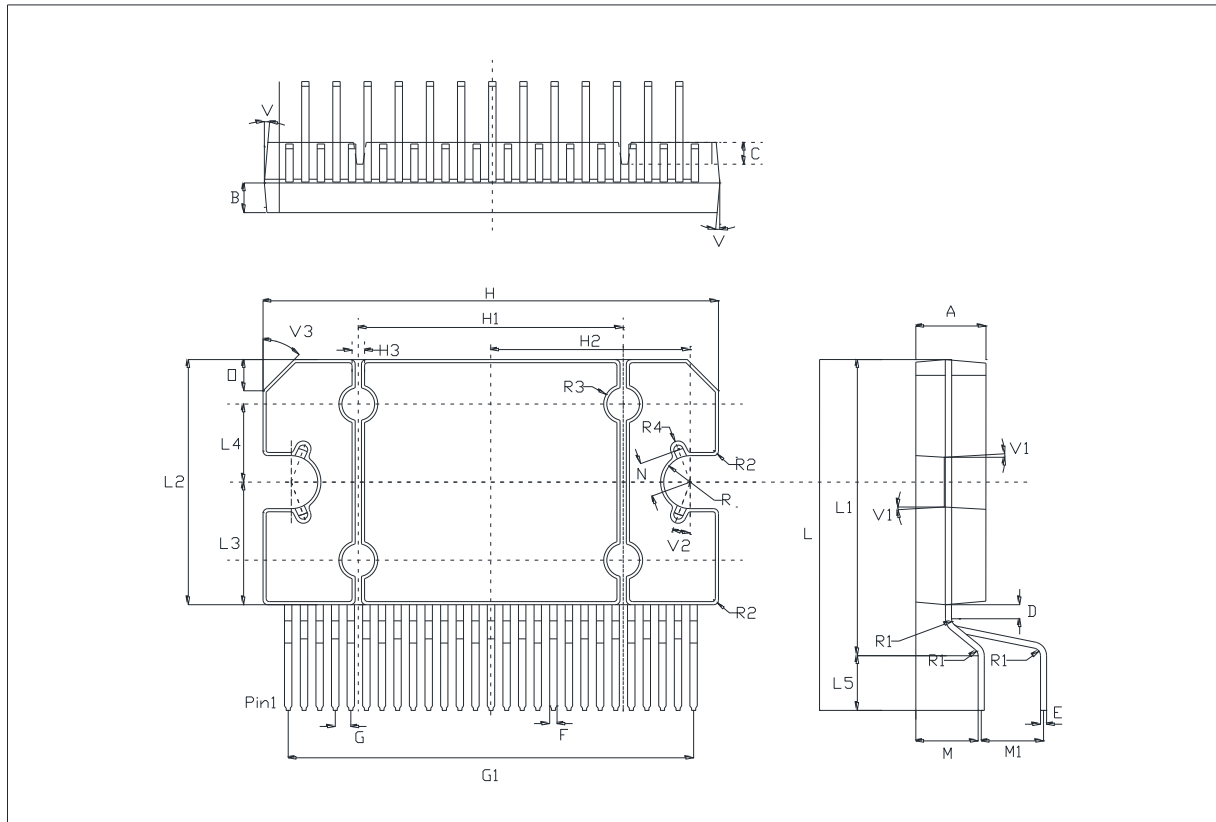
HZIP 27-pin Package Outline<sup>[1]</sup>
